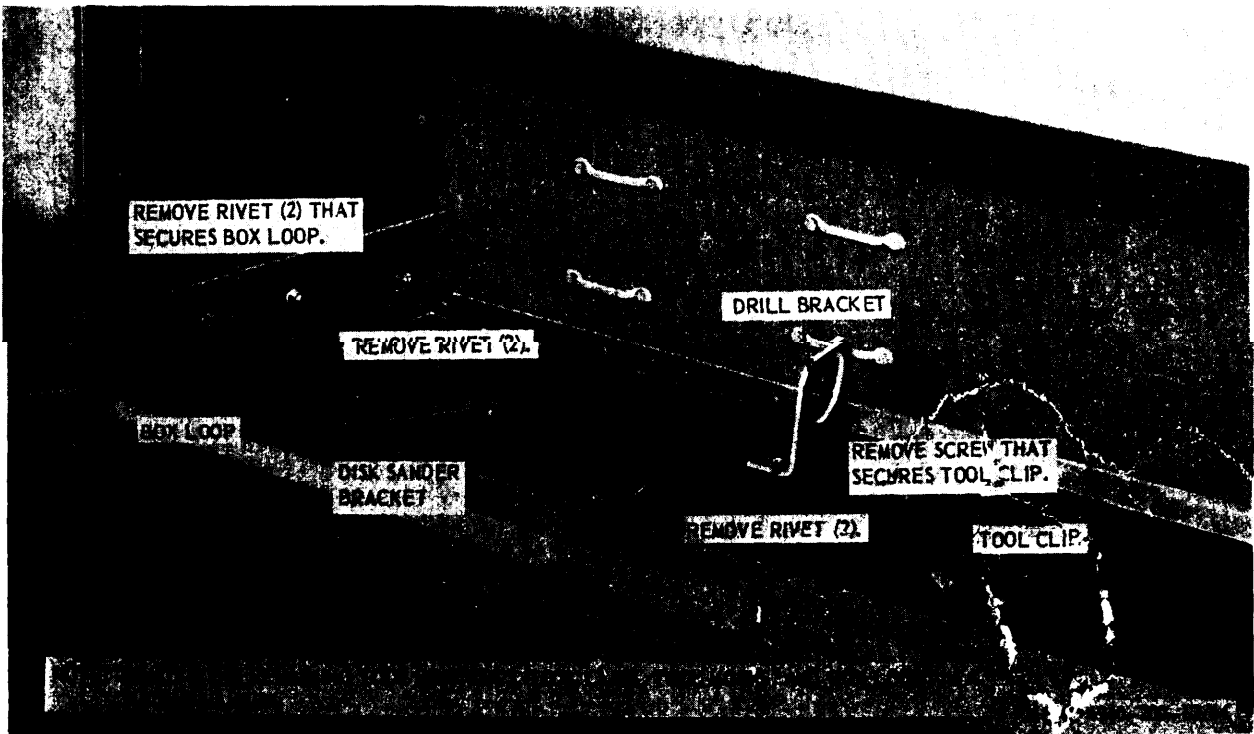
Tool brackets, tool clips, tool hooks, and box loop, removal and installation.
